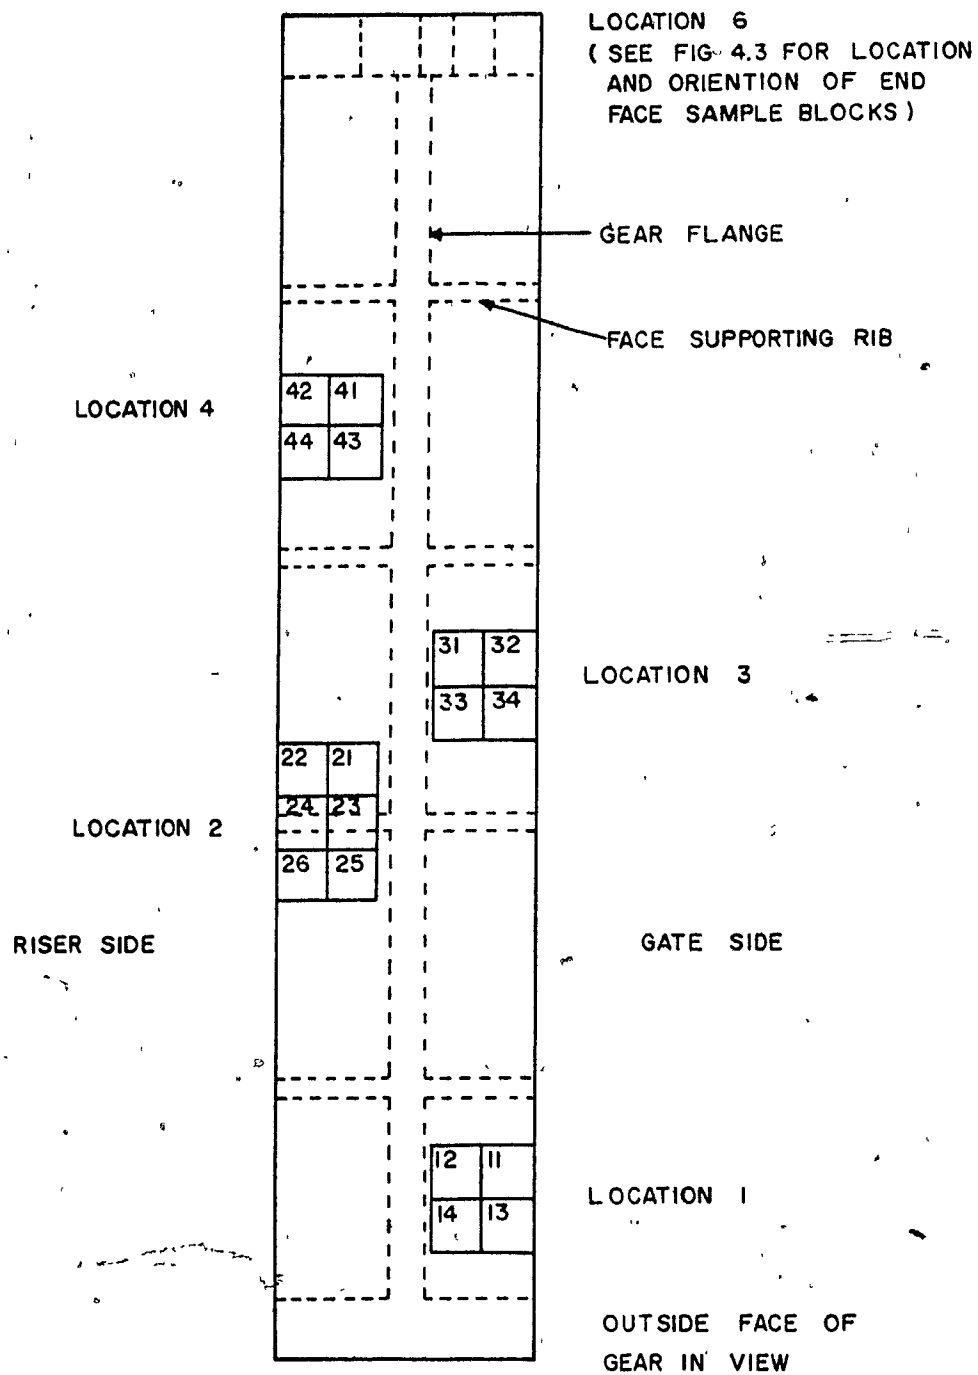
Location of the steel sample blocks removed from the gear face.
